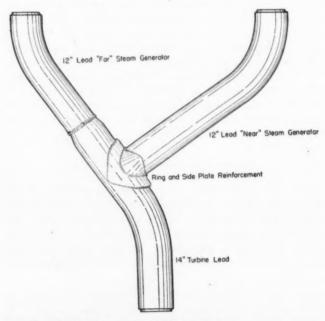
Welded assembly joining leads from steam generators to the turbine lead
